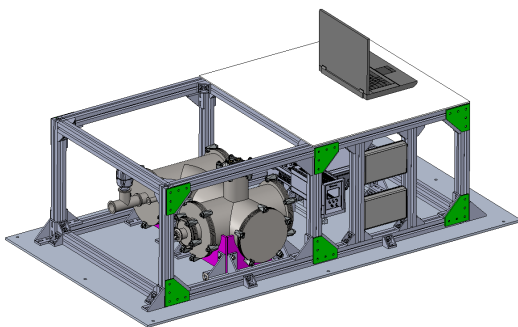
3D CAD Drawing: Rack 1. (Gussets in green and clamps in magenta).
